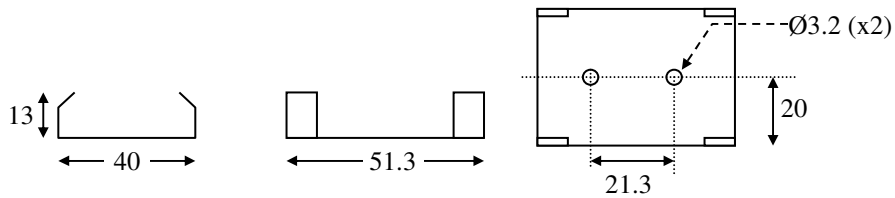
OSD8220 MOUNTING CLIP DIMENSIONS
